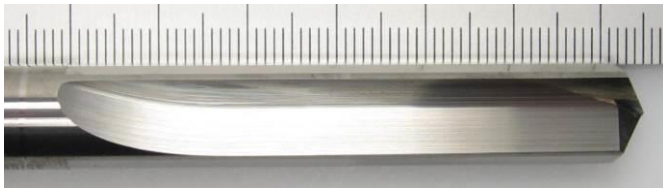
Drill, 8mm, cutting edge 21µm, before processing
